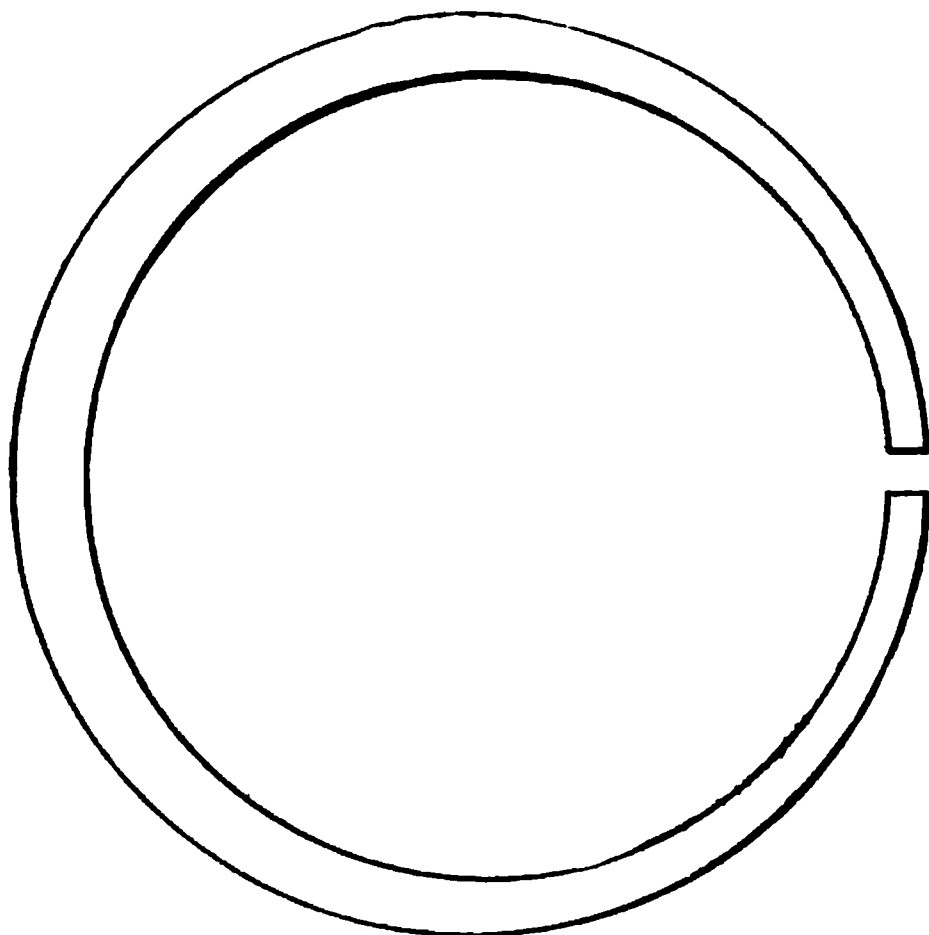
Piston Packing Ring for a Gas Engine Cylinder. The inner and outer circumferences are eccentrically arranged, so as to permit of considerable expansion under heat.
